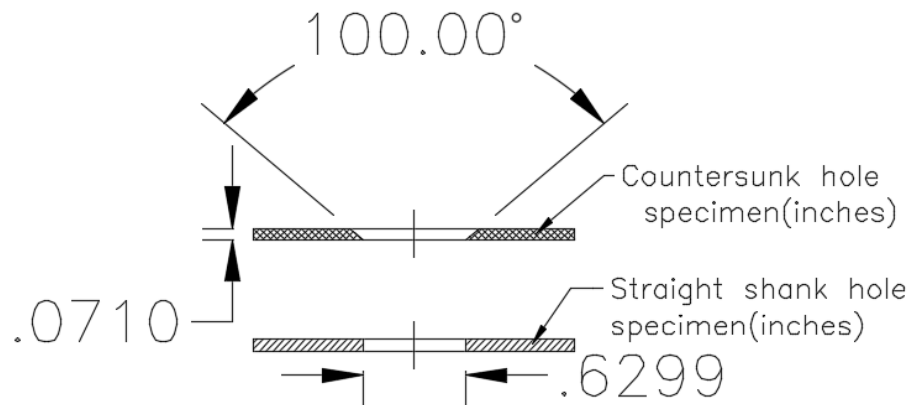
Hole geometries of specimens designed for the study of crack initiation
